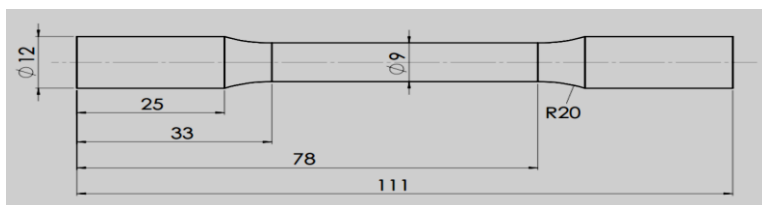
Dimensions of the tensile testing specimen as regard to ASTM E8-09 [1].
